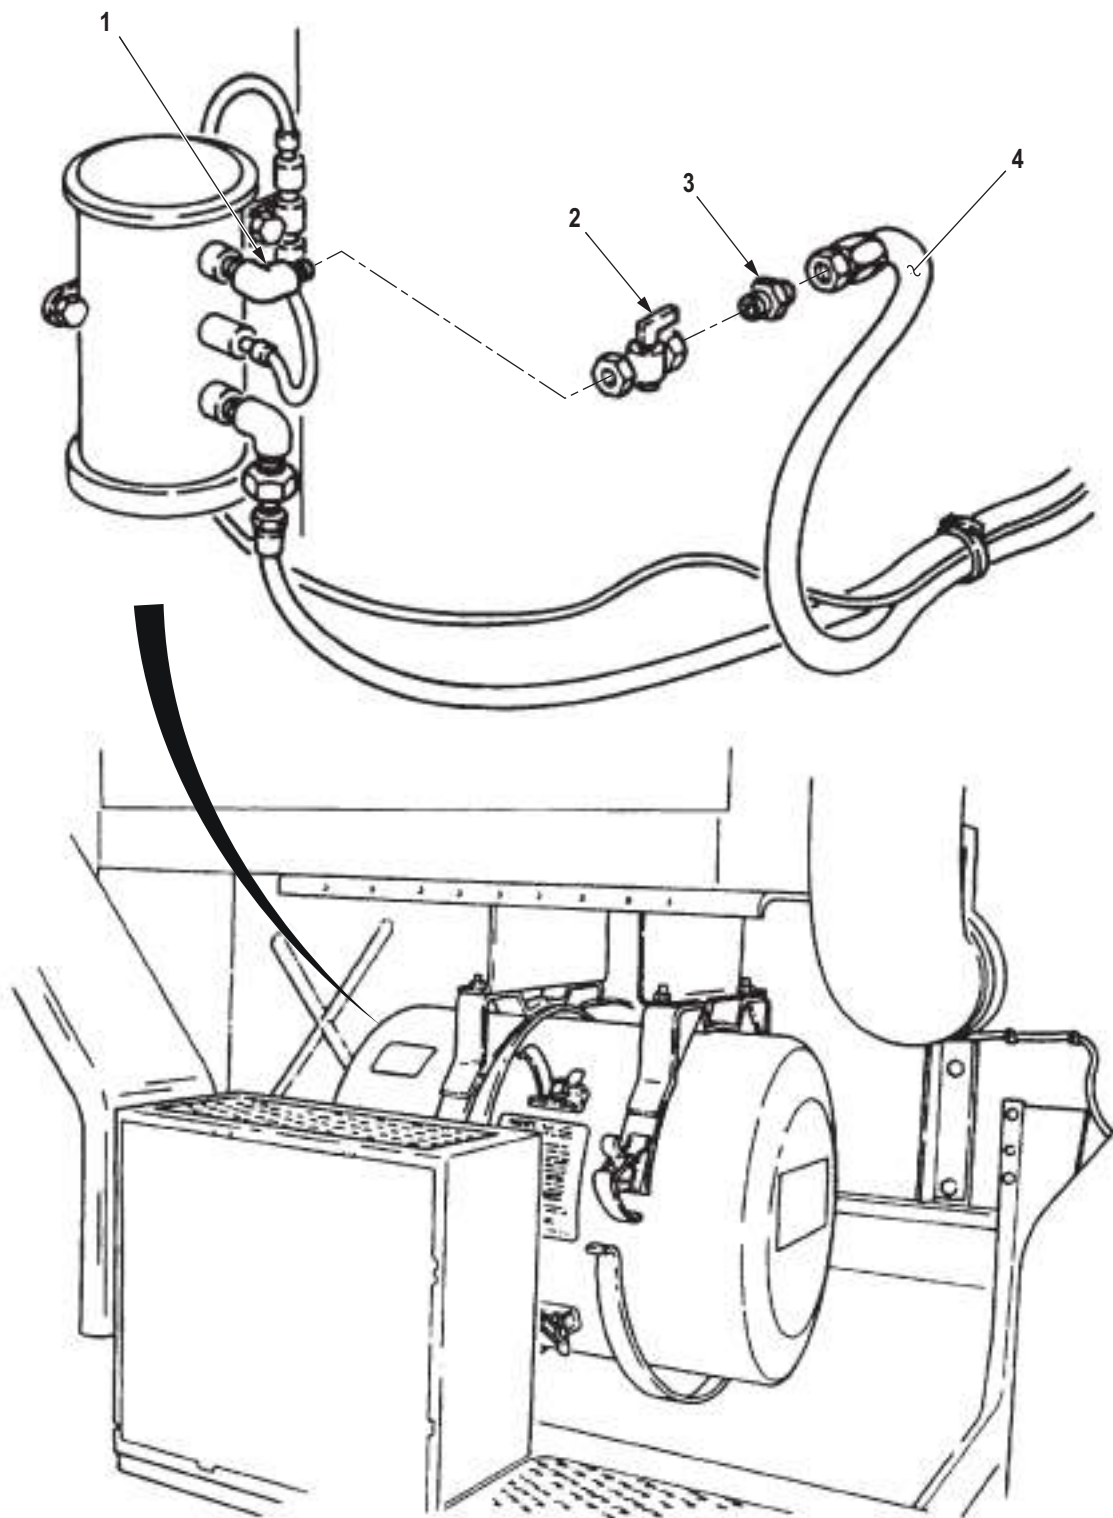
Fuel Burning Heater Fuel Shutoff Valve Removal.*END OF TASK
